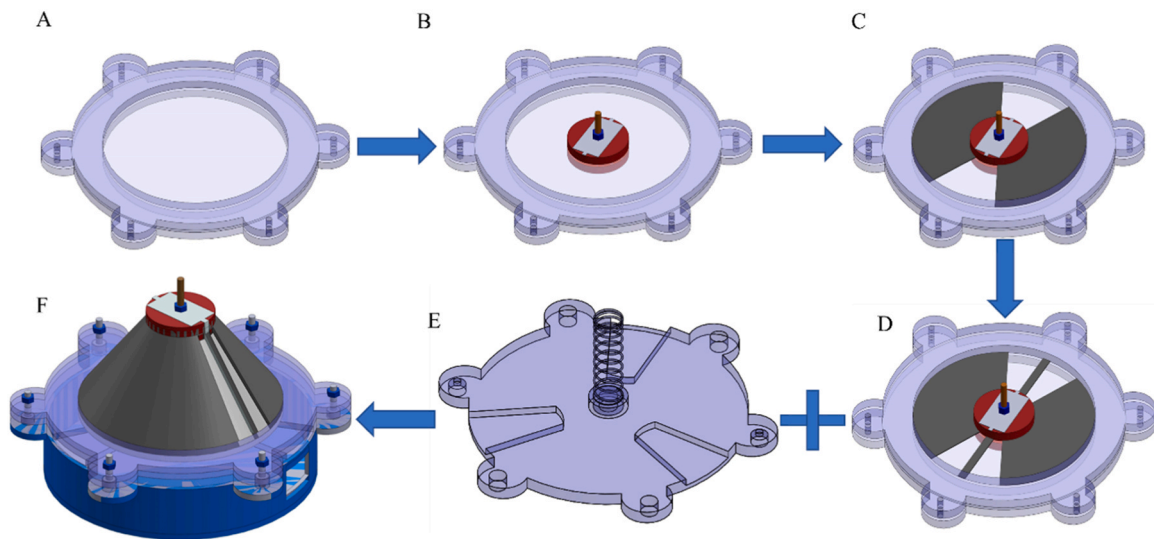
Actuator fabrication steps from membrane attachment to final assembly. (A) The attachment of pre-stretched elastomer membrane onto the outer frame. (B) Inner frame attachment at the center of the membrane using hexagon nut (M3) and bolt (M3 * 12 mm). Attaching aluminium foil tape on the top of the inner frame upper for connecting two sensor tracks segmented by the inner frame. (C) Coating of top and bottom electrodes with Carbon grease (846–80 G) from MG chemicals keeping about 30 degrees as an uncoated region for coating the sensor track. (D) Coating of sensor track using Carbon grease (846–80 G) from MG chemicals. (E) The attachment of the compression spring as a preloading mechanism to the base of the actuator with hot melt glue. (F) Final assembly of the actuator with base cover including all the electronics components attached onboard using six nuts (M3) and bolts M3 * 12 mm).
